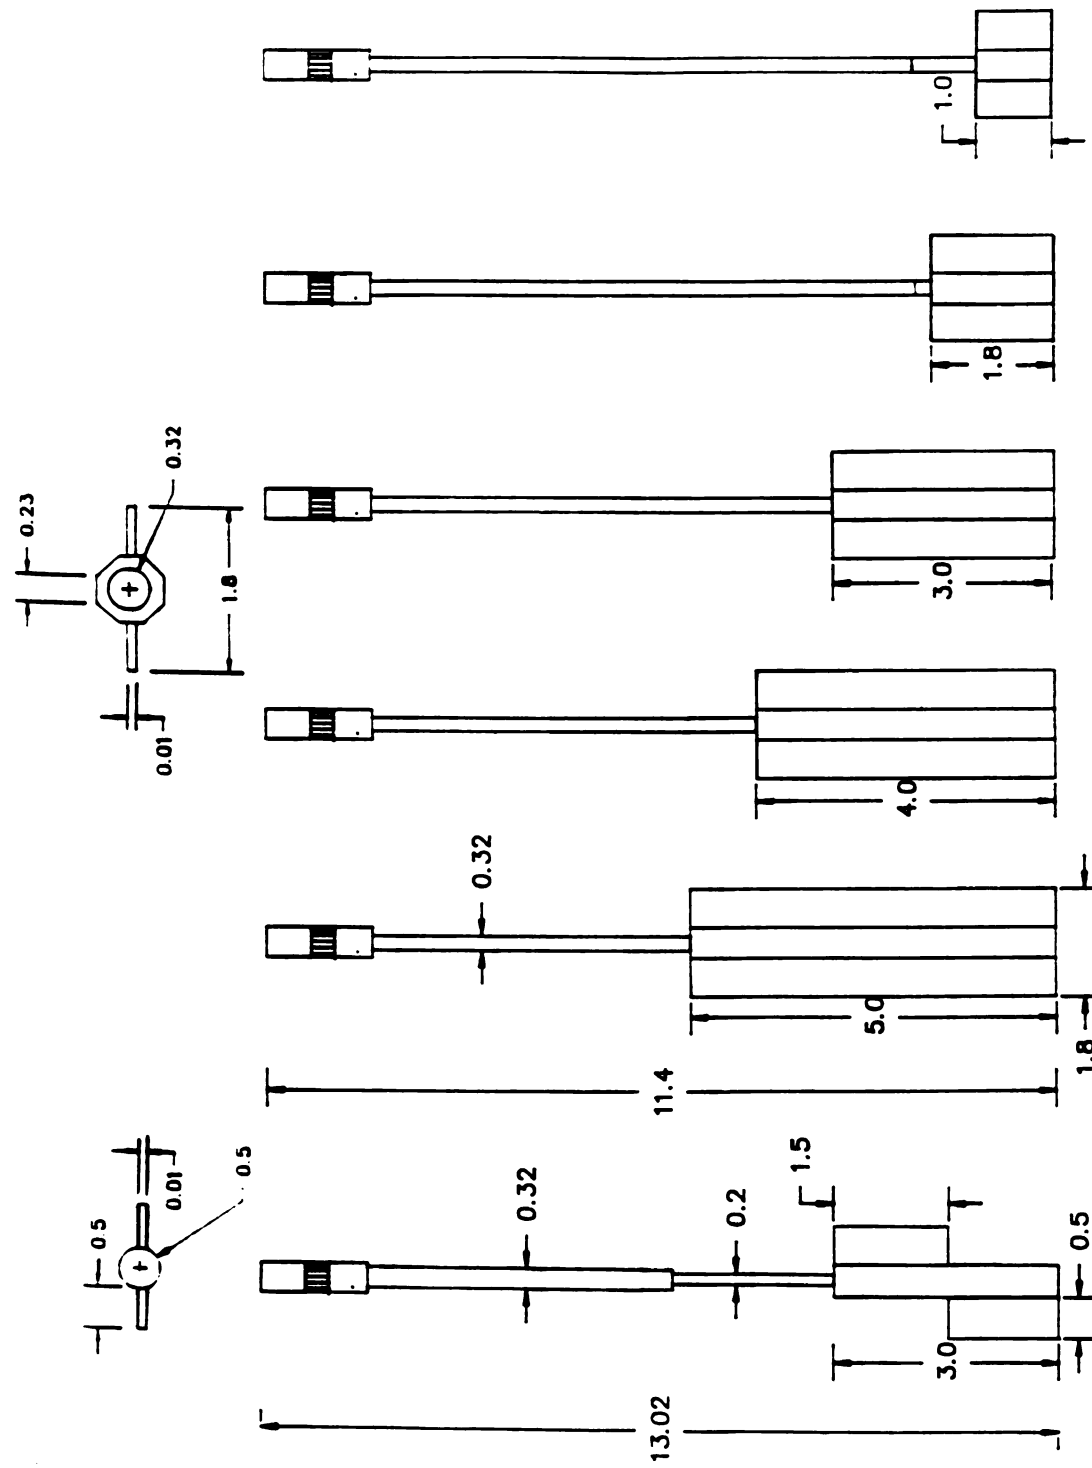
Paddle and Flag Impellers (all dimensions are in cm).
